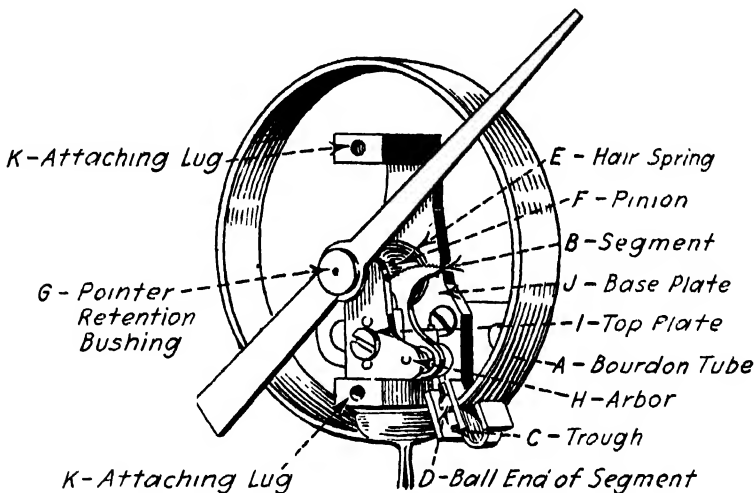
Mechanism of Foxboro Distance Type Thermometer Removed from Casing Showing Parts and Their Relation to Each Other.
